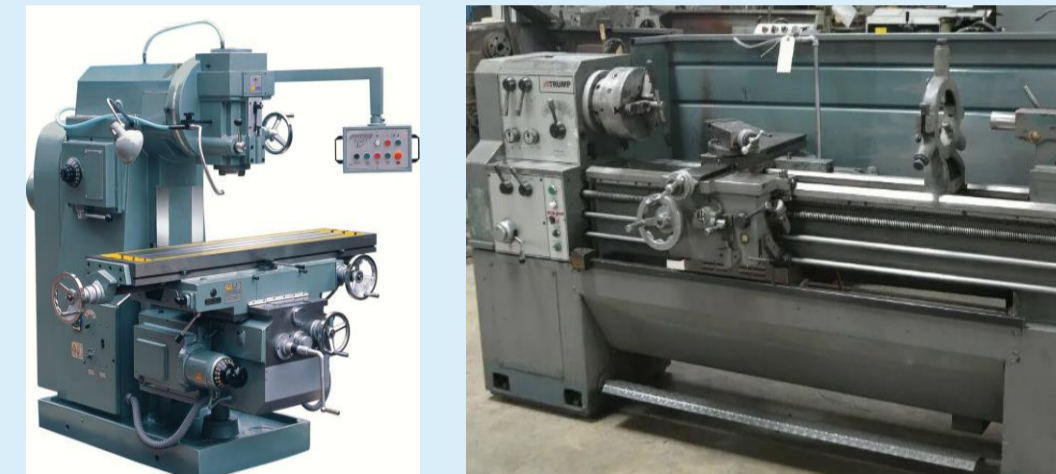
& 5: Mill and lathe used to machine parts of the pump.
